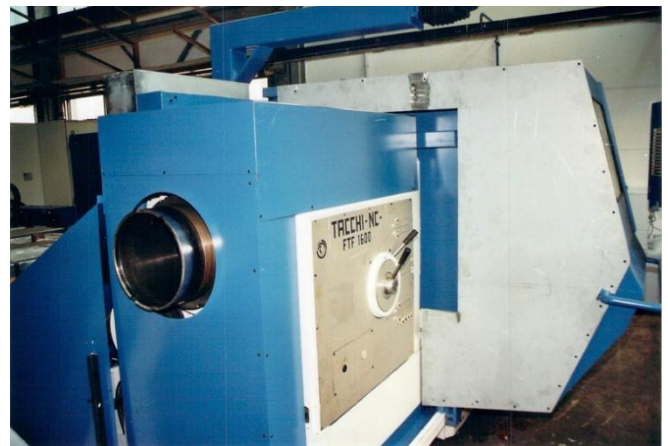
The machine also has a large spindle bore as an oilfield lathe.
